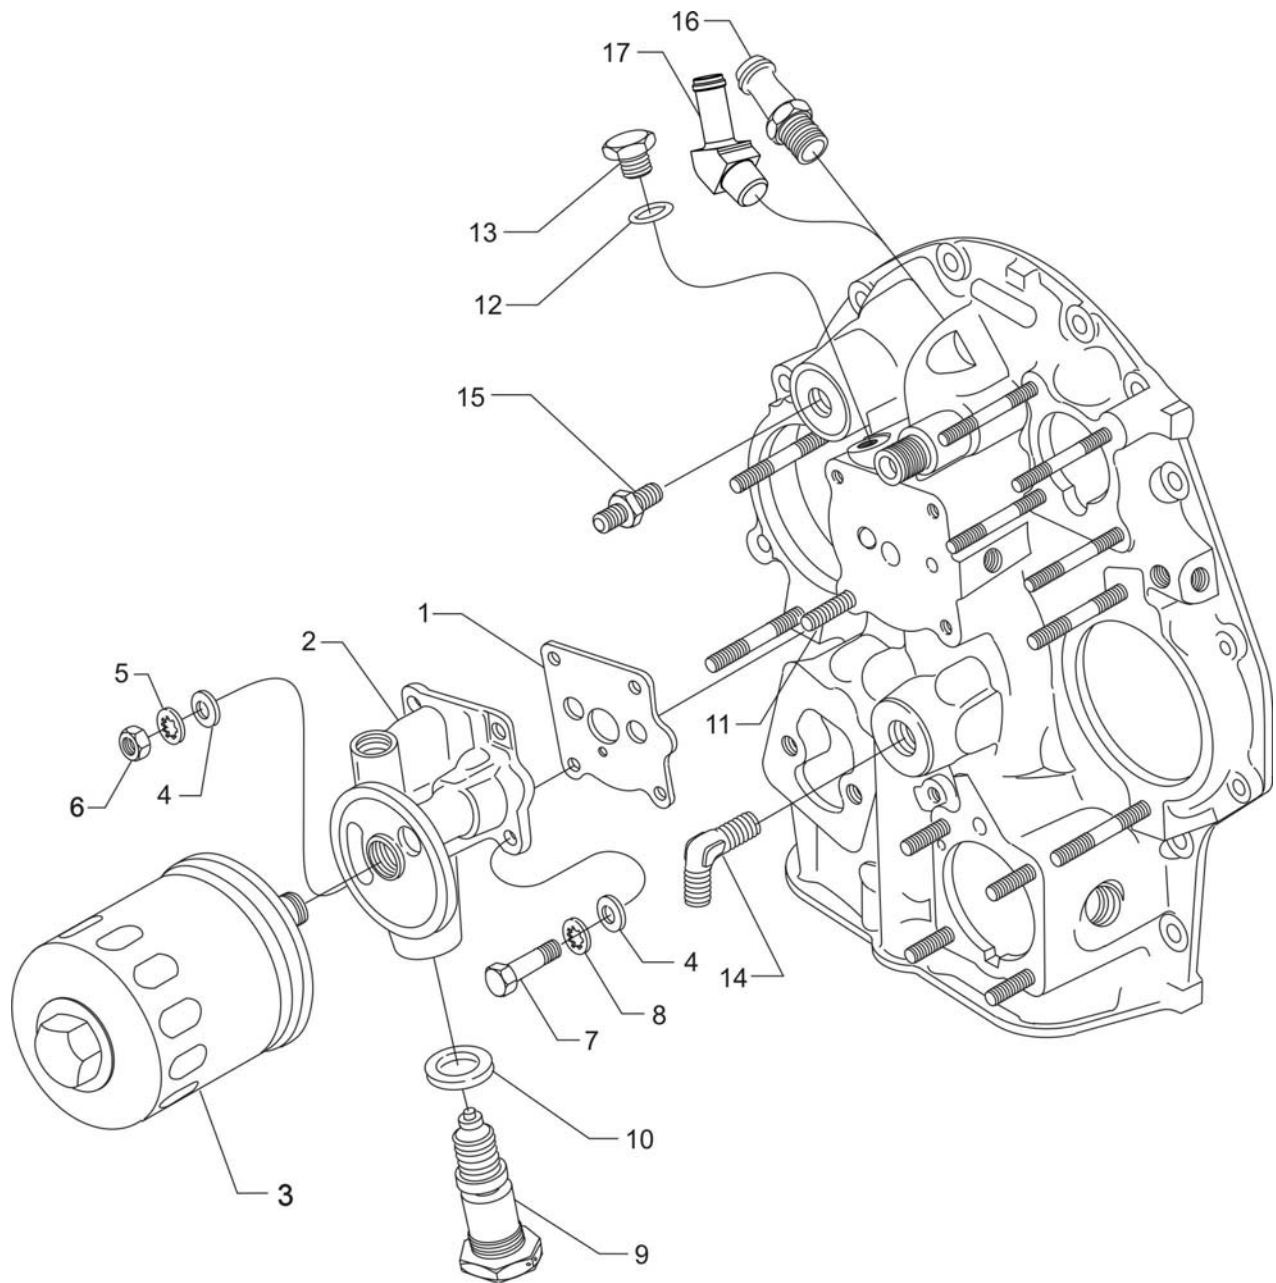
OIL FILTER ASSEMBLY AND OIL COOLER BYPASS VALVE
